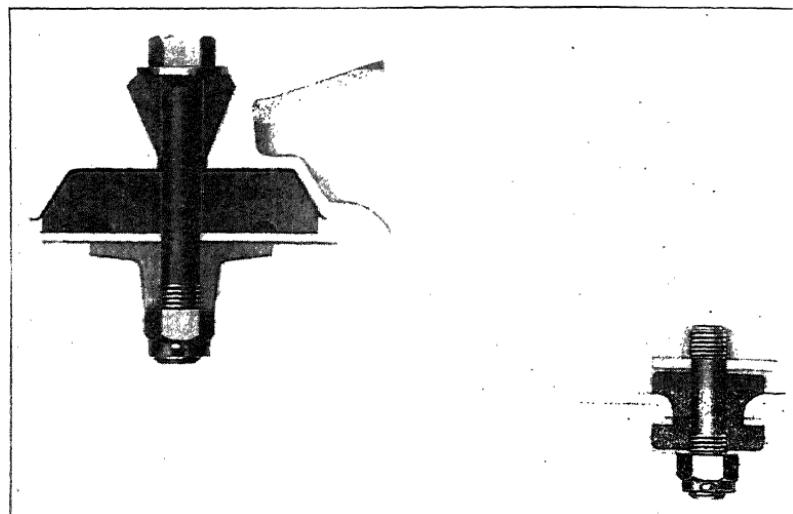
Sectional View of Rubber Engine Mountings of Oldsmobile.
